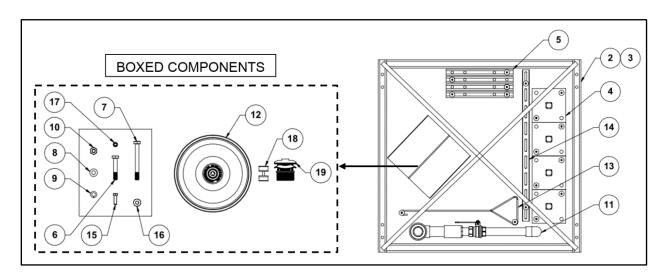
Pallet Contents Model 8740; Item #1 Tank Assembly Removed
